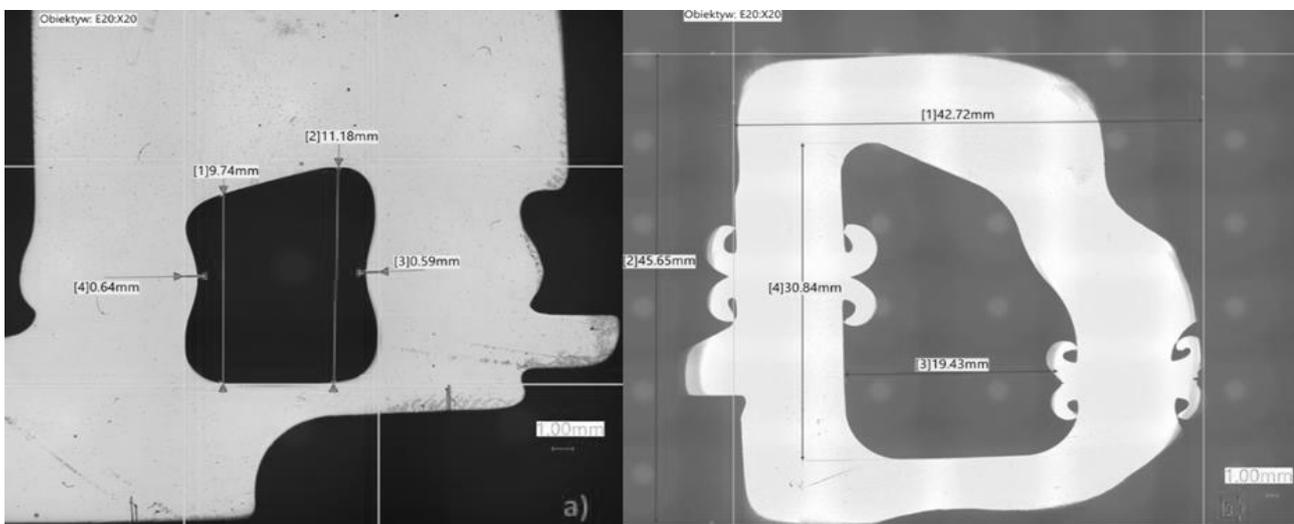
Cross-section of the piston's cooling channel, made a) by friction welding with low pressure, b) by friction butt welding
